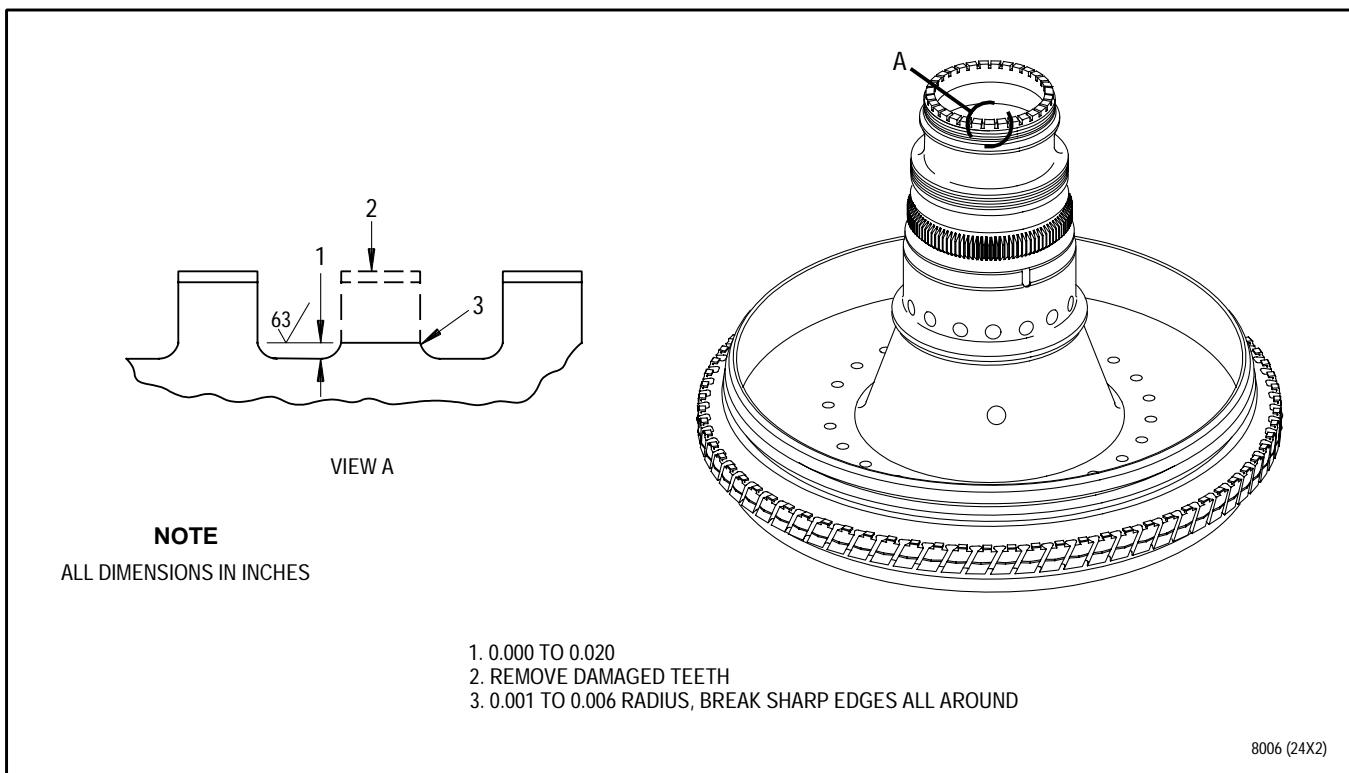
Sixth Stage Compressor Disk and Hub Assembly - Immobilization Teeth Removal
